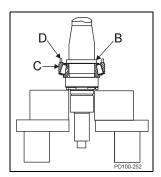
Install Inner & Outer Spacer and Lower Cup
